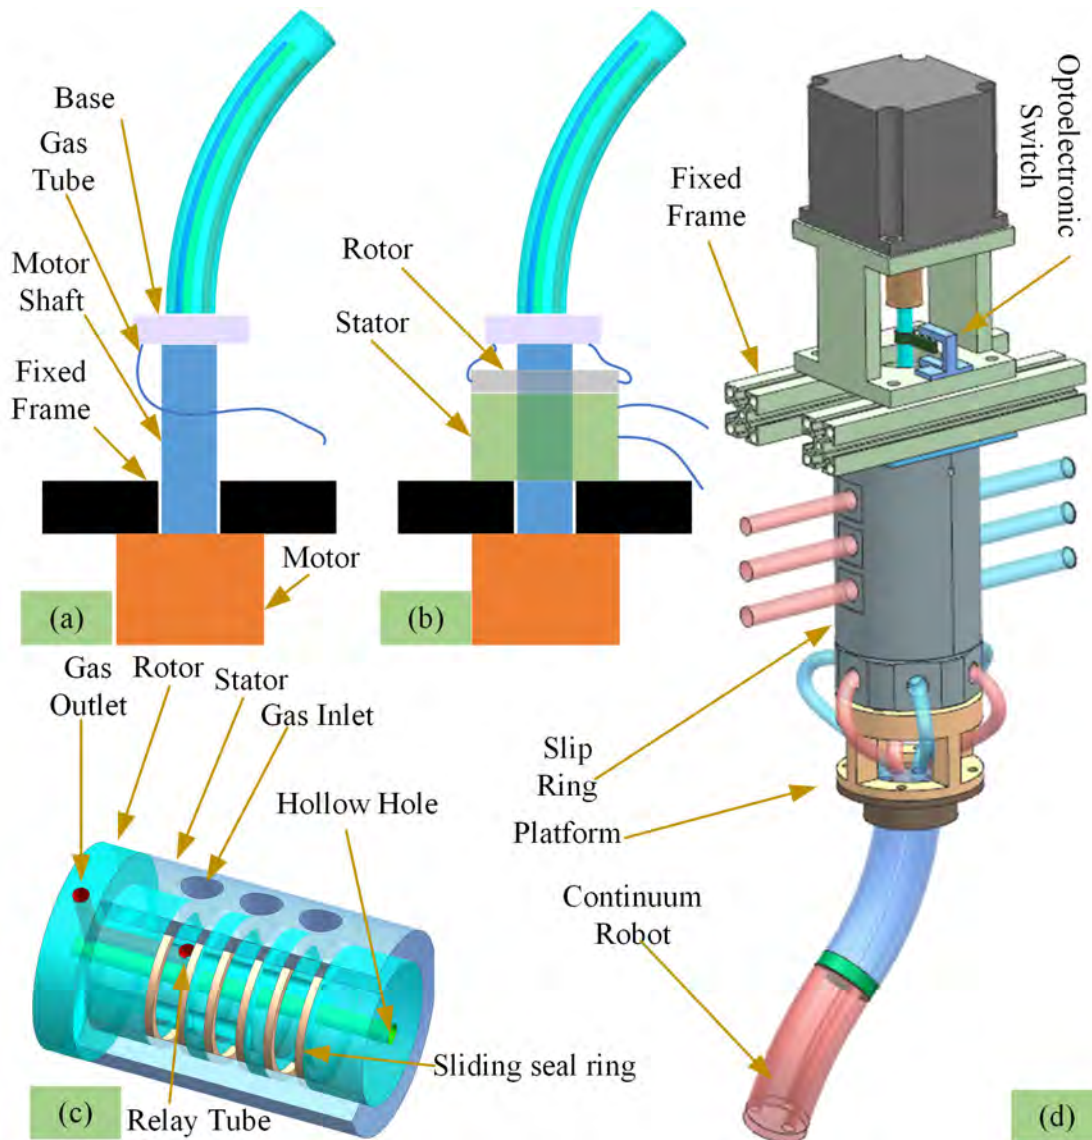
Inspiration and design scheme. (a) Tubes are tangled around motor shaft during rotation. (b) Design with a slip ring to decouple air transmission. (c) Sectional view of a three-channel slip ring. (d) CAD model of the design.
